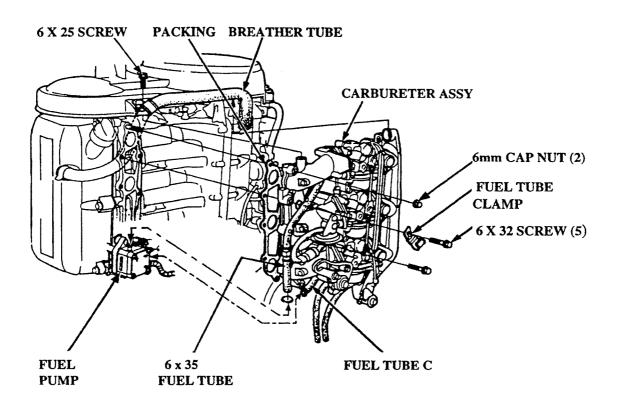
Intake Manifold, Carburetors and Fuel Tubes
